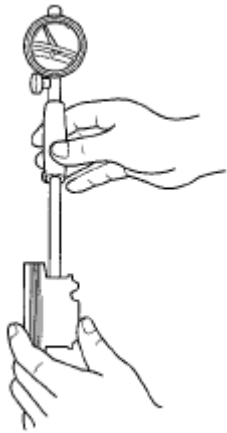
Checking Difference Between Piston Pin Diameter And Piston Pin Hole Diameter On Piston
